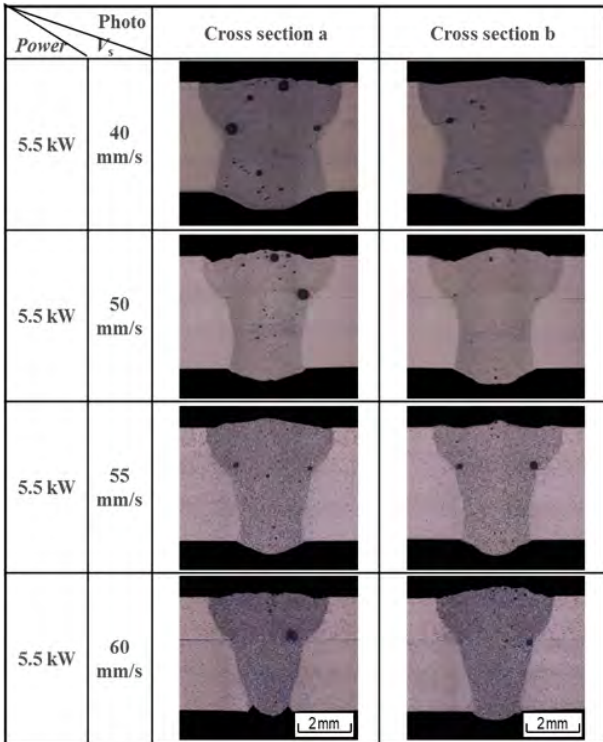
Cross-sectional images of AA6014-AA6451 laser lap dissimilar welding by change welding speed at 5.5 kW laser power with Ar shielding condition
